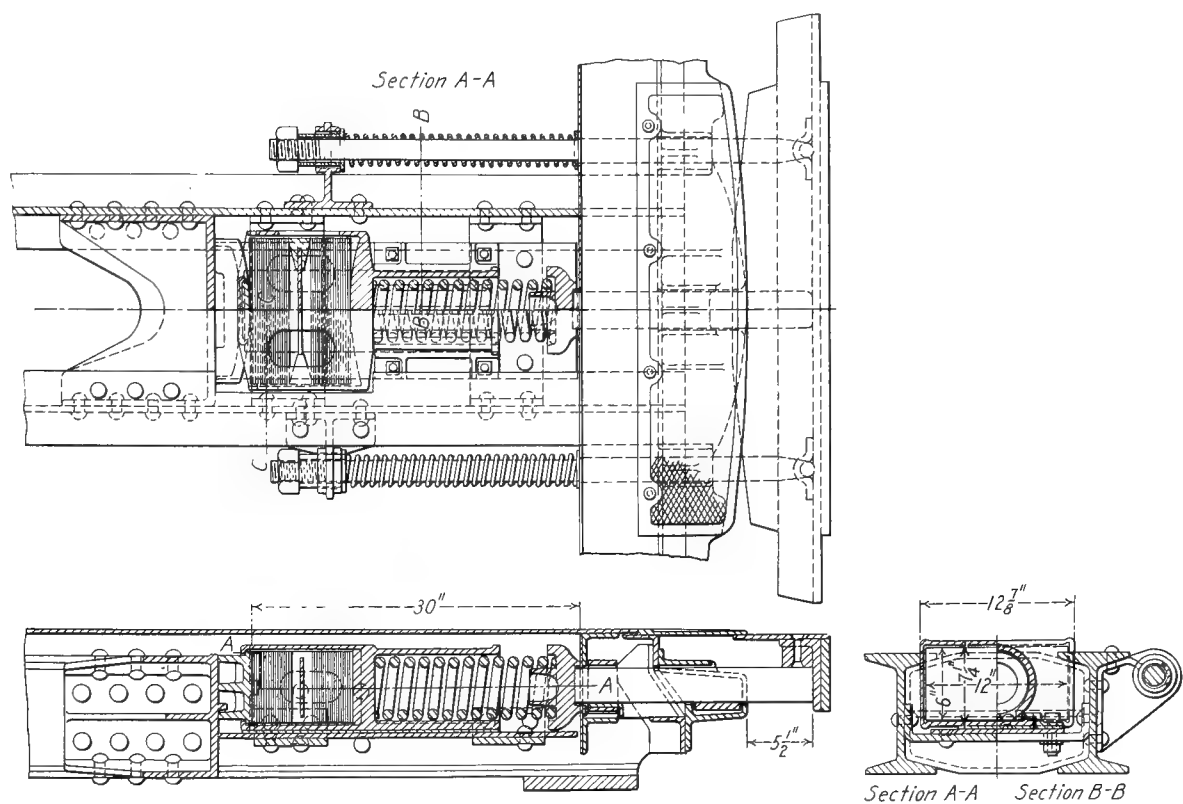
Waugh Buffering Device Arranged for Steel Passenger Train Cars. Waugh Draft Gear Company.
